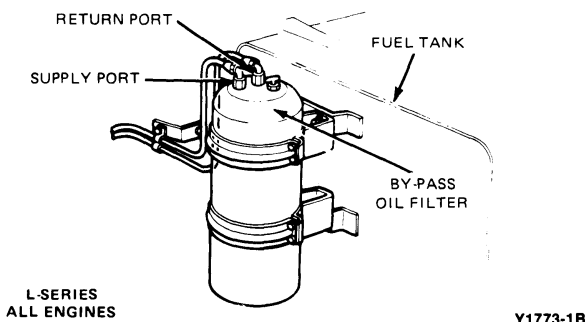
By-Pass Oil Filter Installation Integral Fuel Tank Mounted
